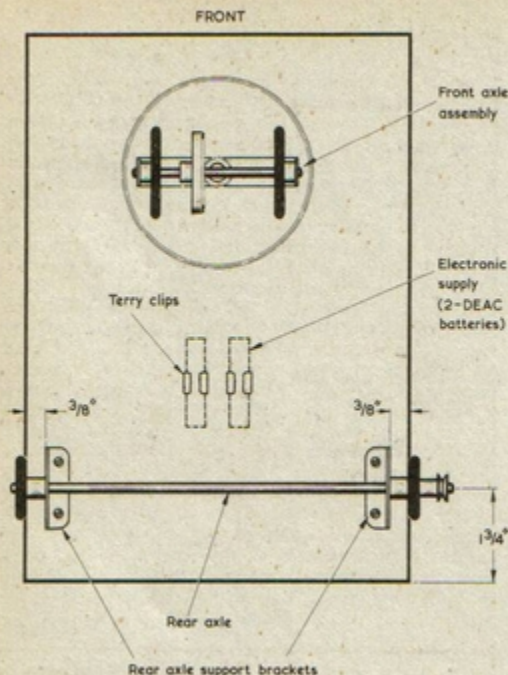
Underside view, illustrating the position taken up by the rear axle assembly. Also shown are two Deac batteries. These will later be used to power the electronics
